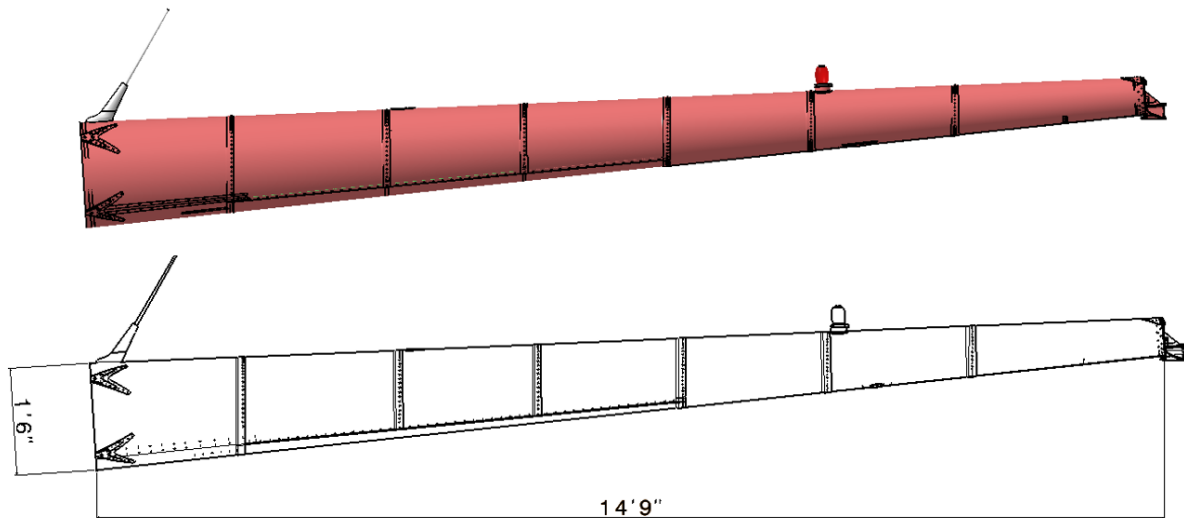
Part 27 Rotorcraft tail cone assembly overall dimensions.
